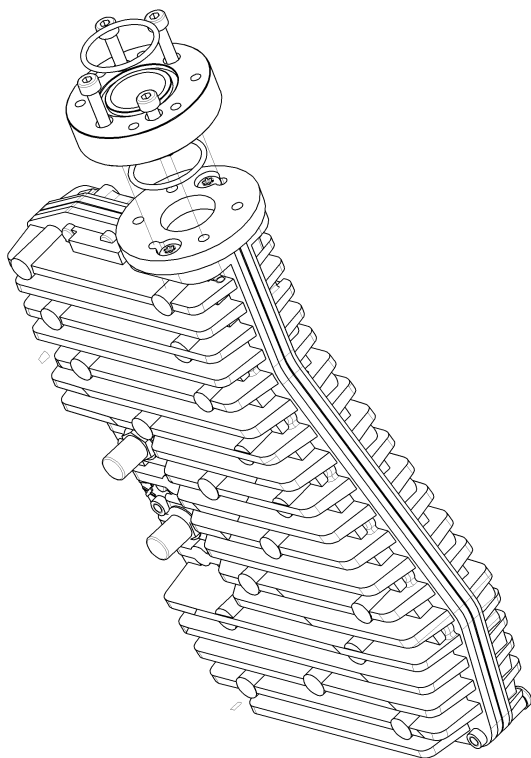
Mounting of SatLink 4901 (STM P/N 107268) on SatLink 403x. Remember to fit rubber gasket on both sides of the adapter to prevent moisture intrusion. Fasten the adapter using 4 UNC screws supplied with the SatLink 403x. Hand tighten with Allen key.
